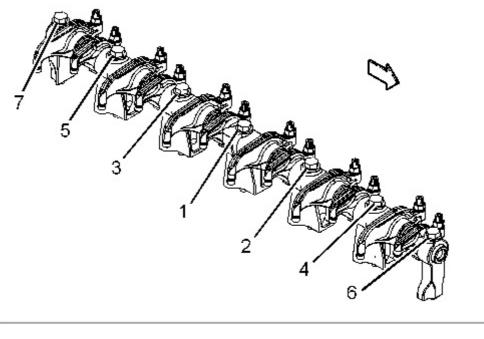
Rocker shaft hold down bolts tightening sequence g02685496
